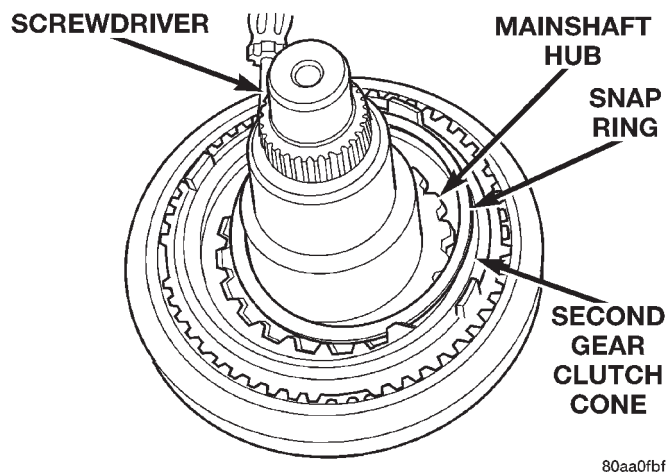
Installing Second Gear Clutch Cone Snap Ring
